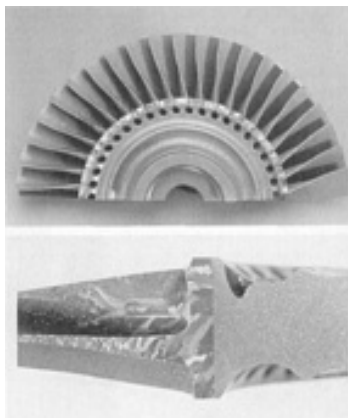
Section of a dual-alloy property turbine wheel produced by HIP bonding a cast IN-713C blade ring to a P/M LC Astroloy hub. Courtesy of AlliedSignal Engine Division
